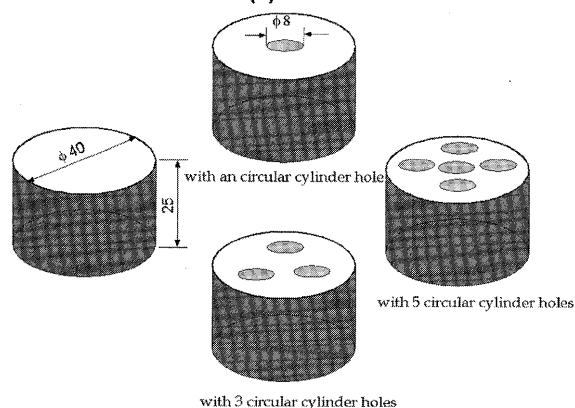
Wooden blocks bored  $\Phi 8$  mm drill holes.
